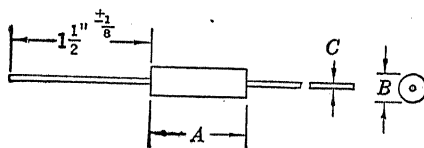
Low-power wire-wound resistor dimensions.
